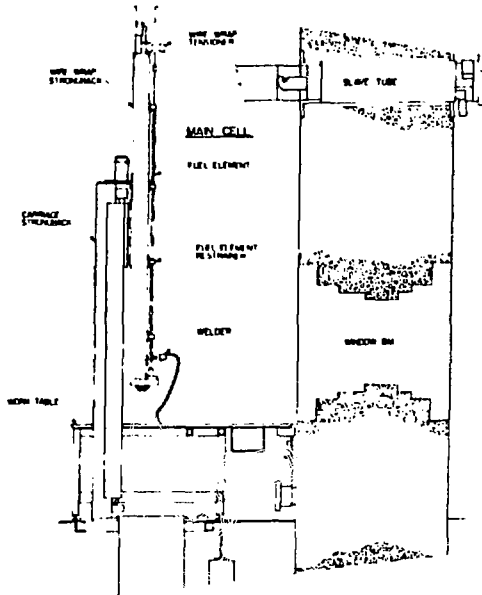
Irradiated Element Spacer Wire Wrapping Machine
